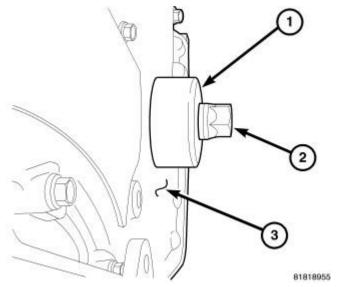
Front Oil Seal Installed Courtesy of CHRYSLER GROUP, LLC
